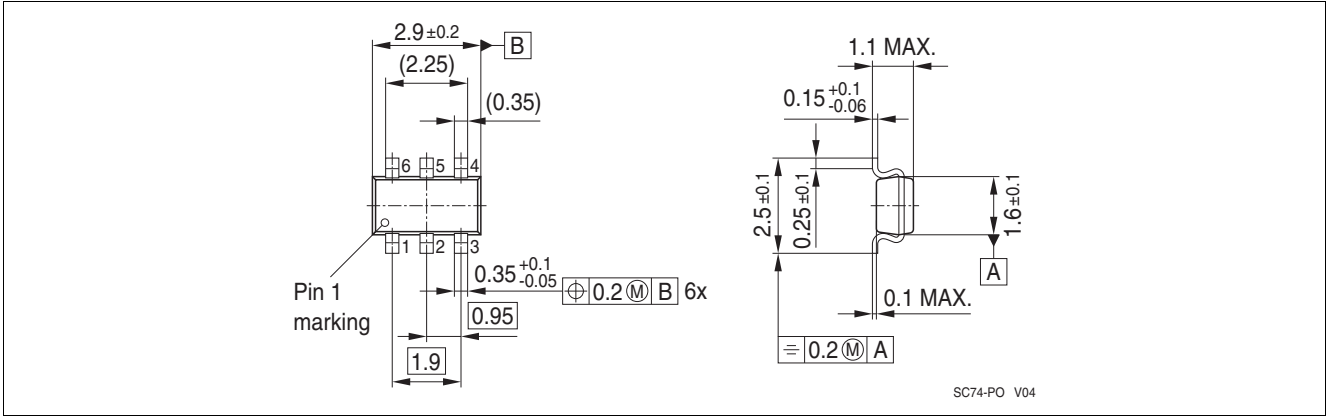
Package Outline for SC74 (dimensions in mm)
